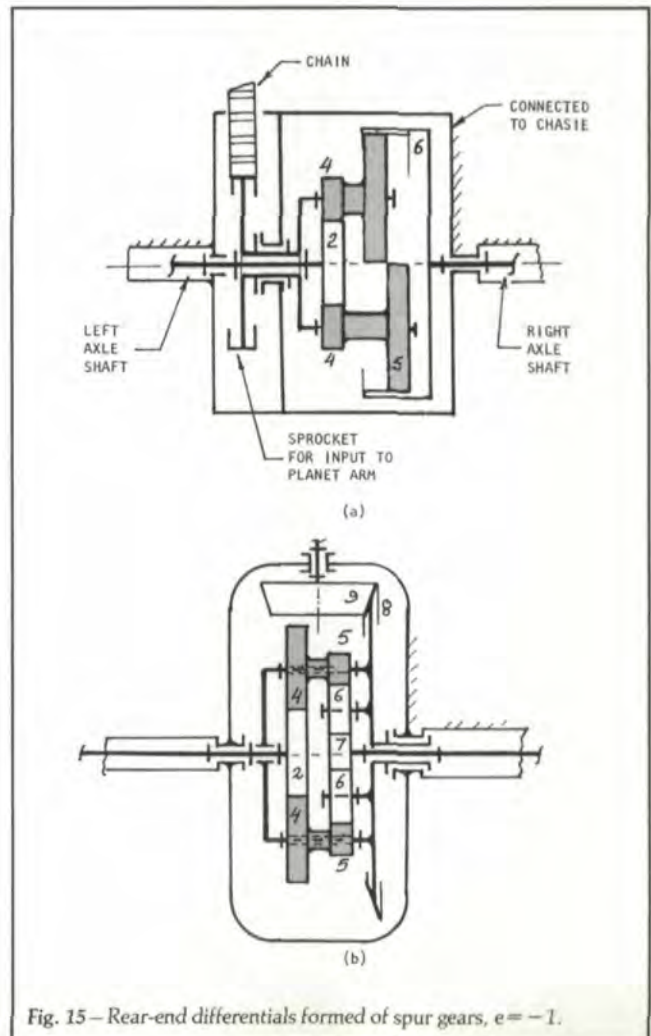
Rear-end differentials formed of spur gears, $e = -1$.
